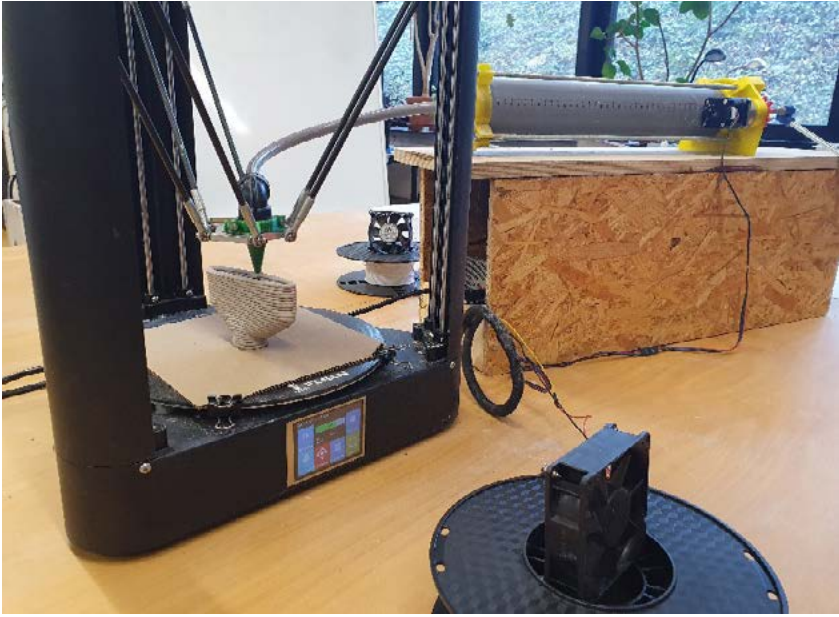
Clay printing setup composed out of delta printer, custom clay tank with ram extruder and drying system using fans.
